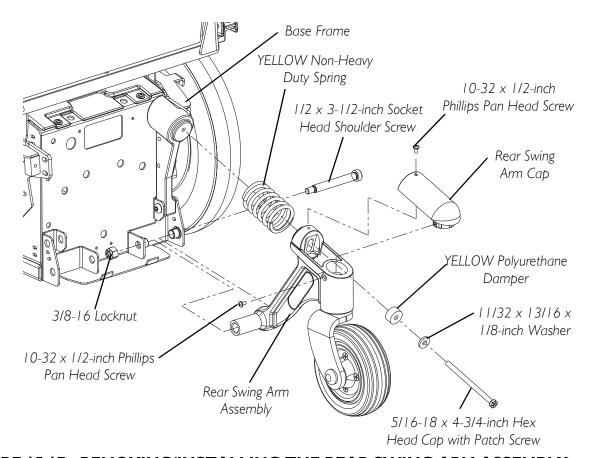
REMOVING/INSTALLING THE REAR SWING ARM ASSEMBLY
